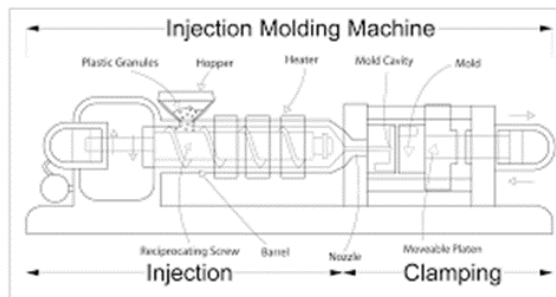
Diagram of the moving parts in the injection molding process. (Rockey)
